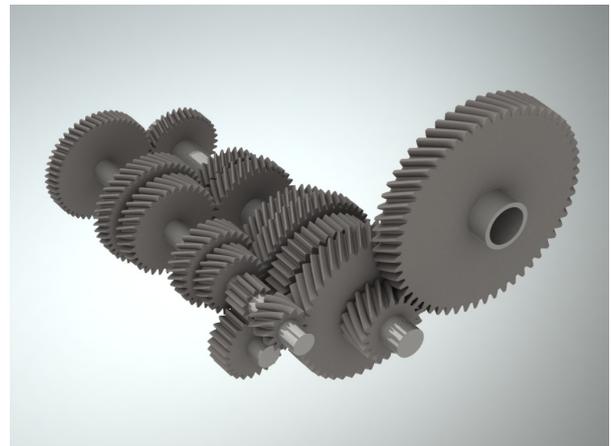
3D CAD model of CMT-6M gearbox at geometrical level.
